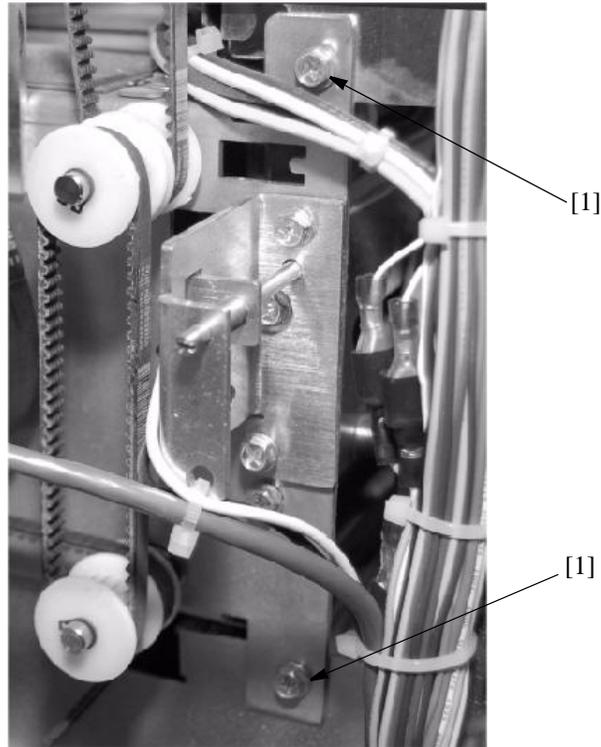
Punch Module Retaining Screws on Rear of Punch.
